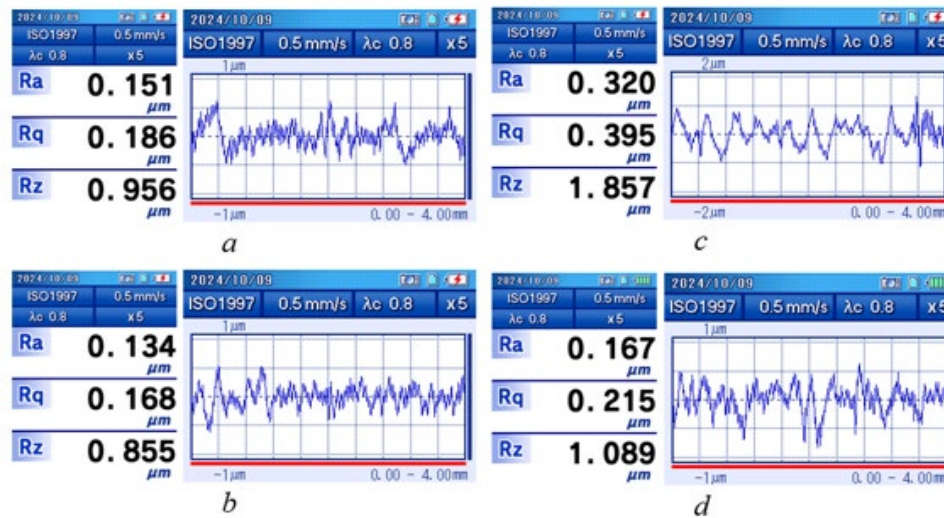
The results of measuring the surface roughness of the PC3 profile on one side of each test, (a) carbon steel with DoC 0.2 (b) stainless steel with DoC 0.2 (c) carbon steel with DoC 0.3 (d) stainless steel with DoC 0.3
